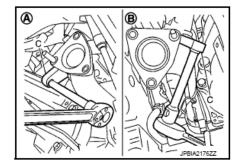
Removing Air Fuel Ratio Sensor 1 (Bank 1 And Bank 2) Using Heated Oxygen Sensor Wrench
